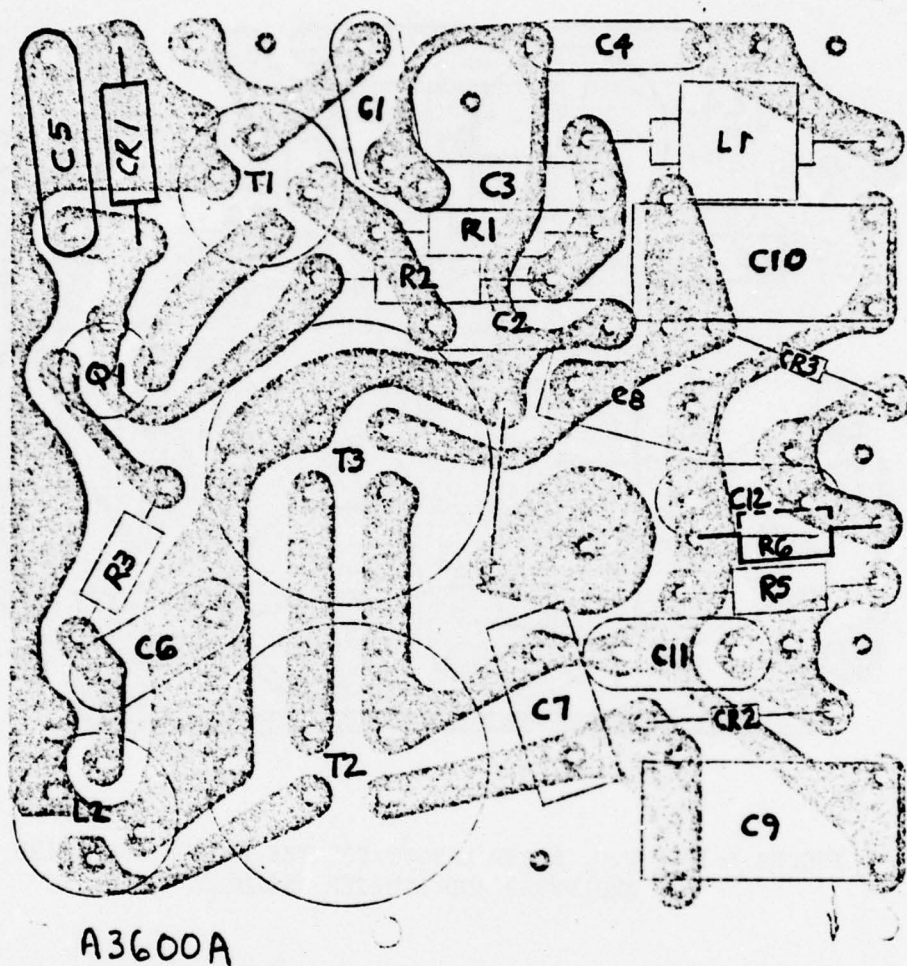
P.C. BOARD LAYOUT FOR THE A3600A CRS HUNT DISCRIMINATOR ASSEMBLY
